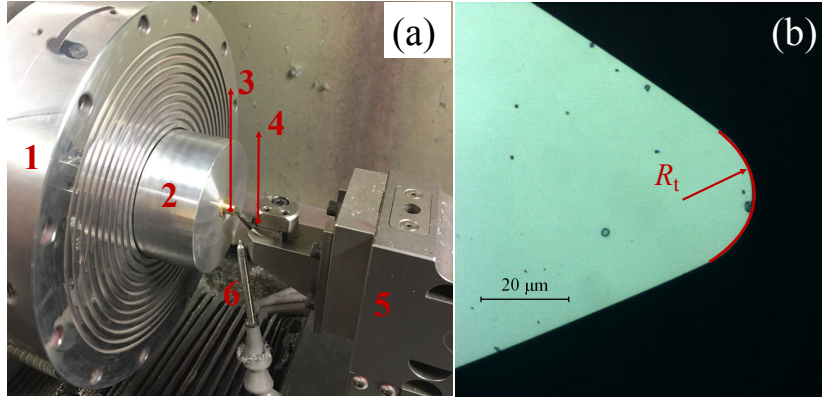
Photography of the machining system for micro/nanofluidic channels, (a) hardware configuration of the machining system, and (b) the microscopy image of the employed diamond tool, where 1 vacuum chuck, 2 fixture, 3 cylindrical sample, 4 diamond tool, 5 tool holder, 6 lubricant supplier;  $R_t$  denotes the nose radius of the diamond tool.
